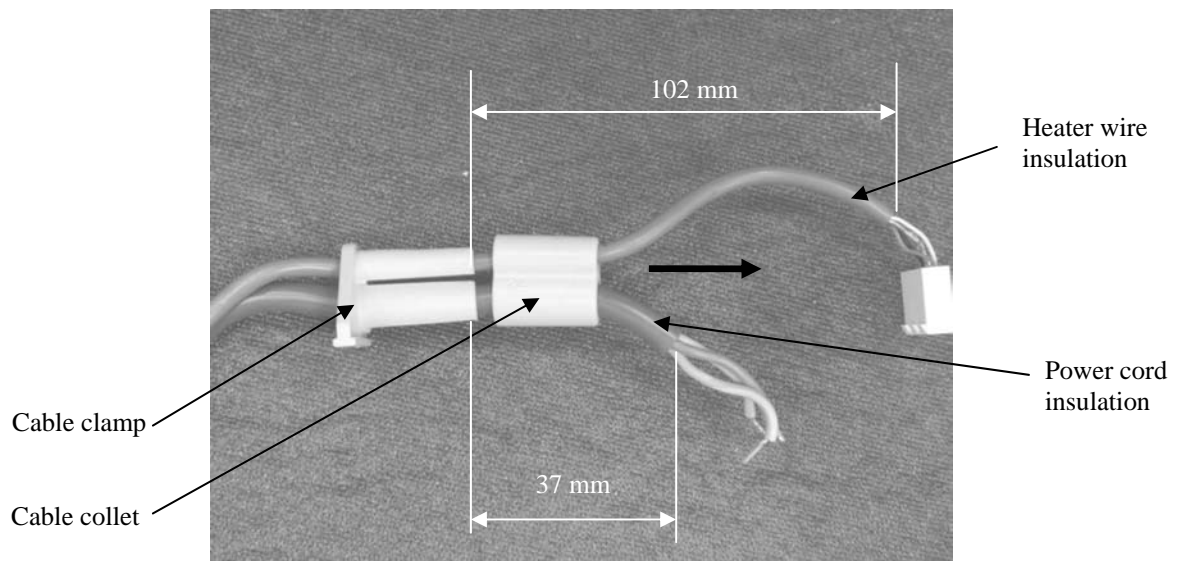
Showing the disassembly, assembly of the cable clamp
